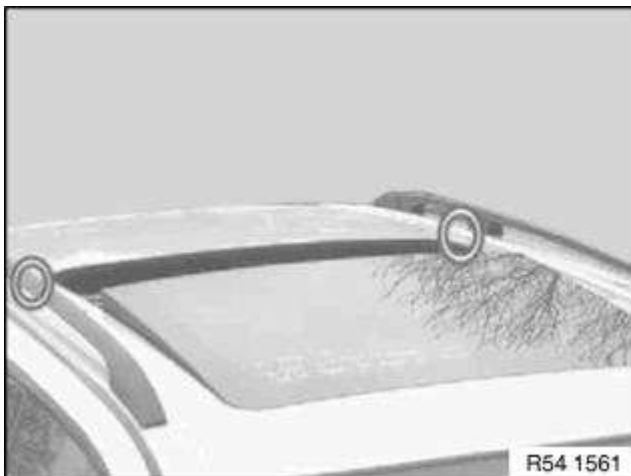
Approximate Position Of End Fittings Between Floating Roofliner And Roof Outer Skin
